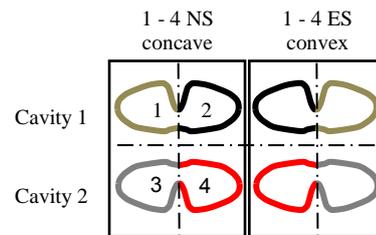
Tool layout of the measured bispherical samples. The same-color molds form together a spectacle side.
